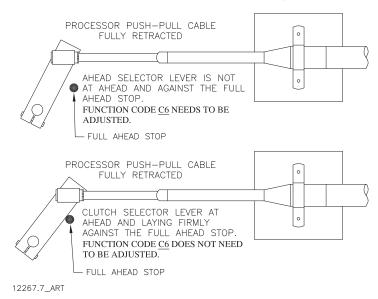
Clutch Push-Pull Cable Ahead Position
